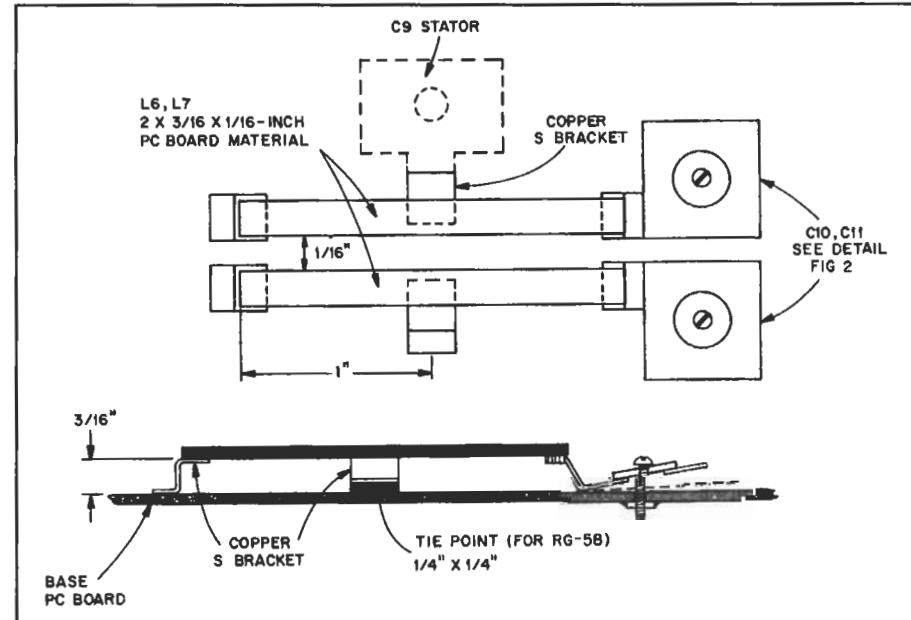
Construction details of the double-tuned output filter. The assembly is supported by copper brackets and parts of the variable capacitors.
